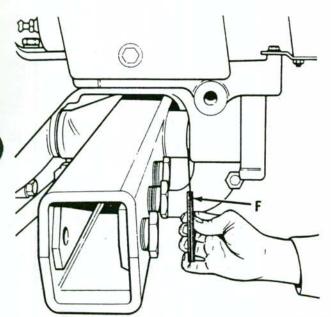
Measure end play of front axle with a feeler gauge as shown for model 399 with two-wheel drive.
